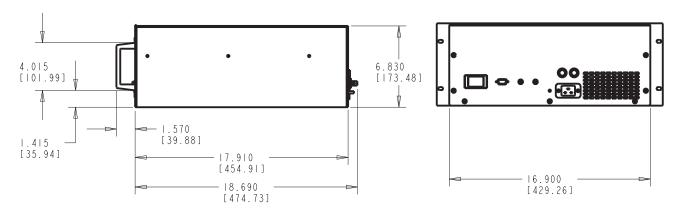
Outline drawing, power supply, side (left) and rear (right) views
